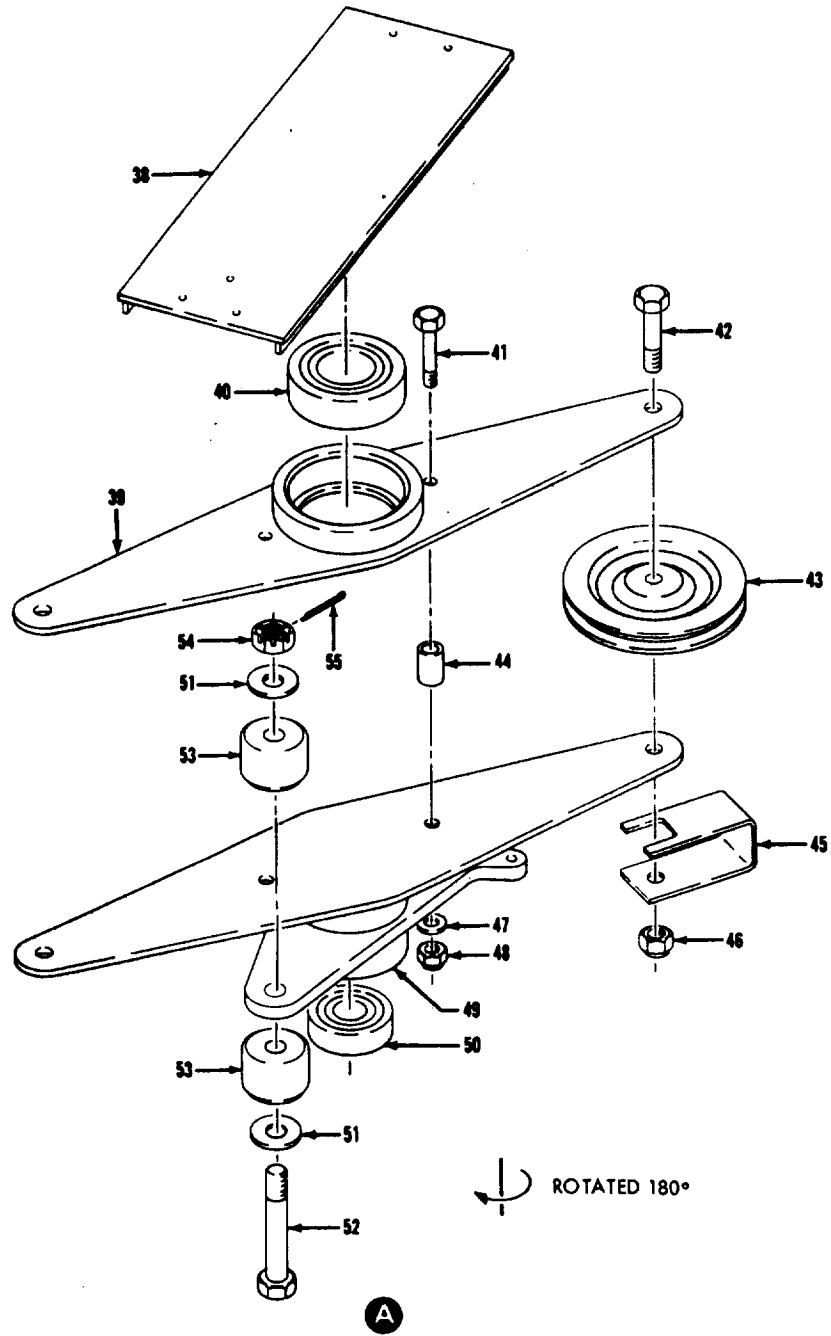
Centering Device Actuator Assembly (Sheet 2 of 3)
